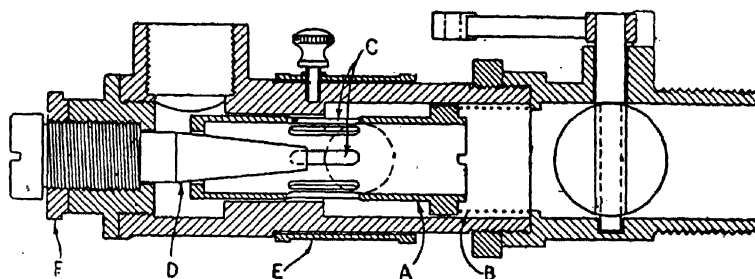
Gas Carburettor of the Gas, Light and Coal Company.
